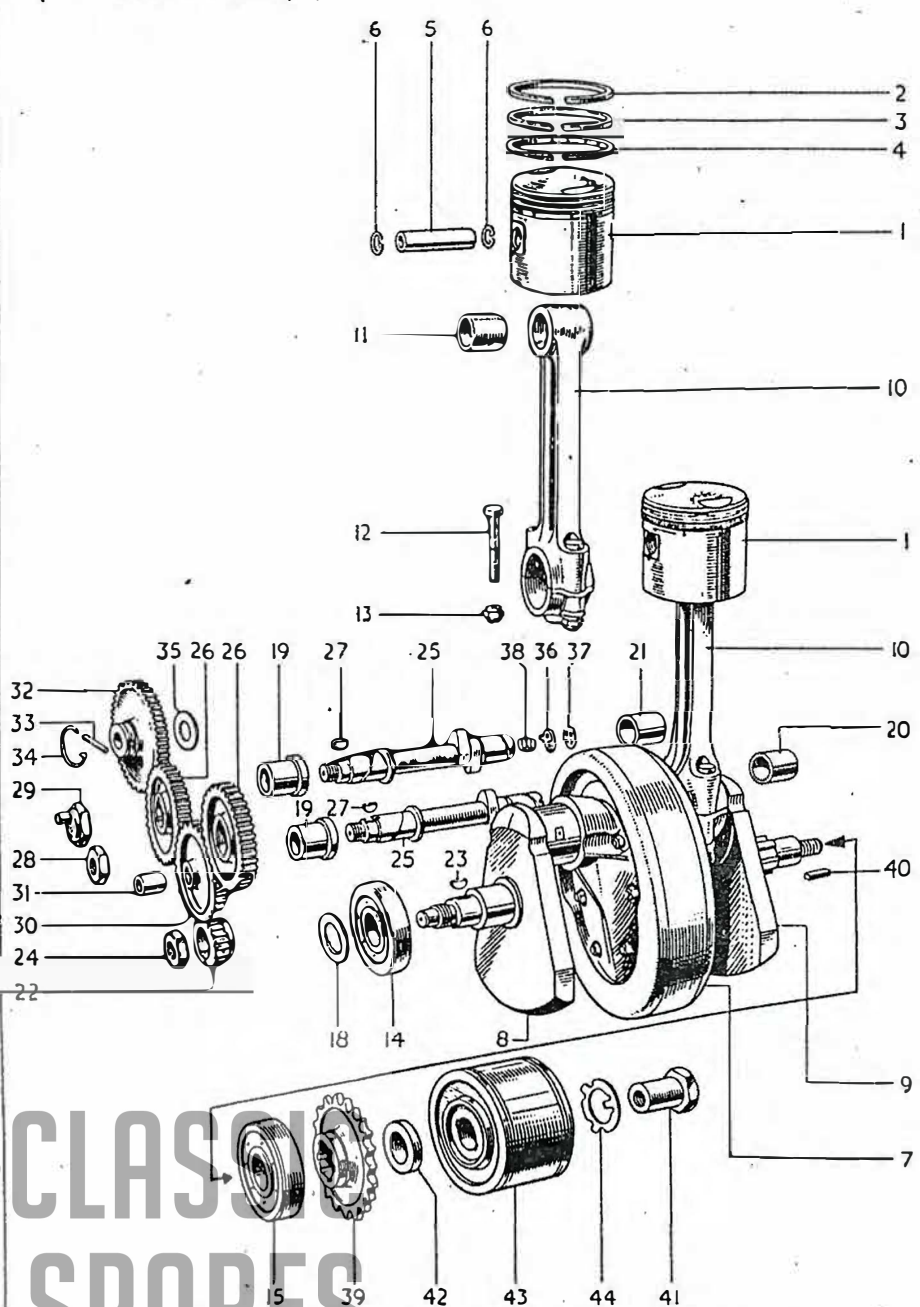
CRANKSHAFT, CONNECTING RODS, PISTON TIMING GEAR, etc.
